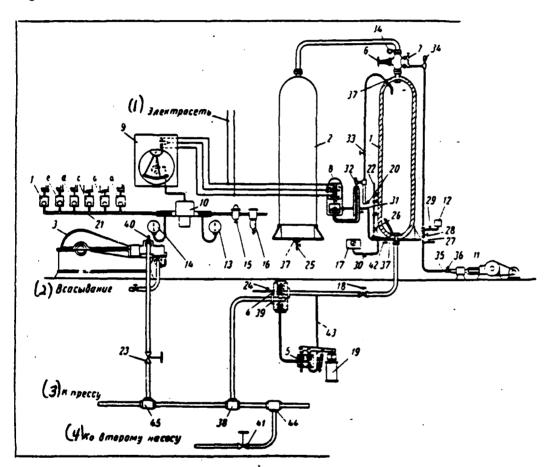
The working diagram of the pump-and-battery station: 1 - 2 - air cylinder; hydraulic bottle; 3 - horizontal three-plunger pump; 4 - automatic check valve of minimum level; 5 - two-valve distributor; 6 - check valve; 7 - check valve on the auxiliary line of valve 6; 8 - apparatus of the checking of the level of liquid; 9 - liquid level
